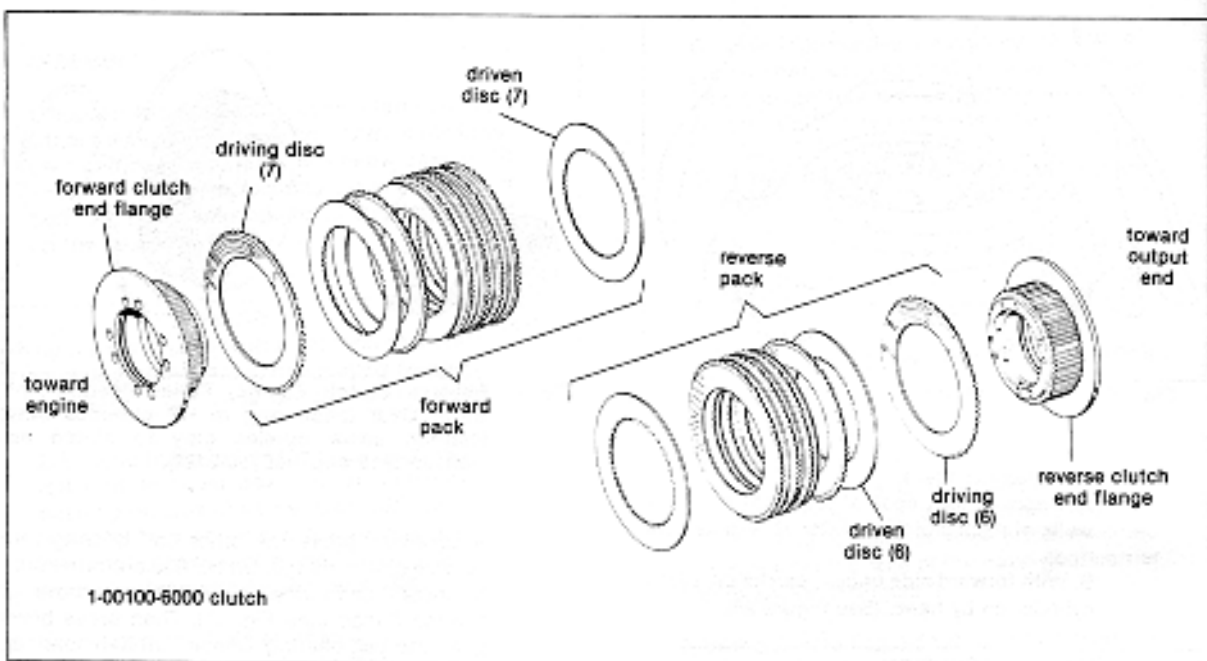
HY-400 Clutch Disc Configuration (1-00100-6000 Clutch Only)
